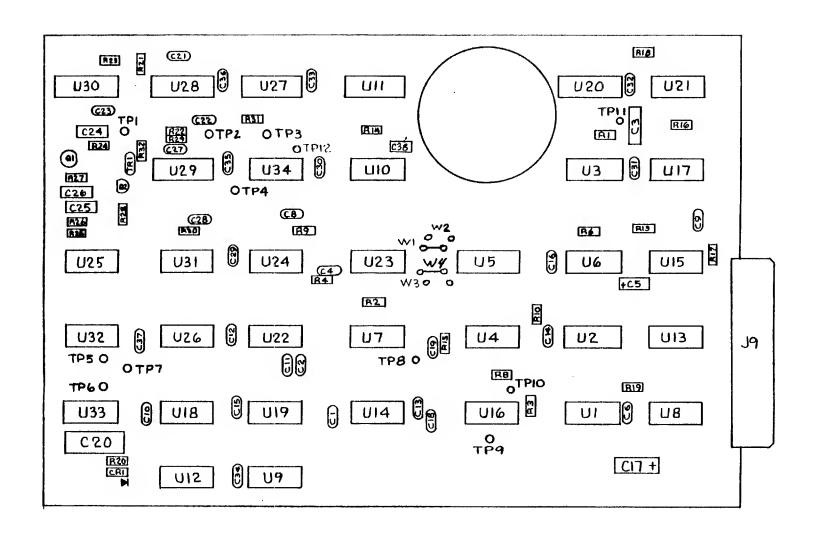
Control Board w/Data Tracker Circuit, Parts Locator
